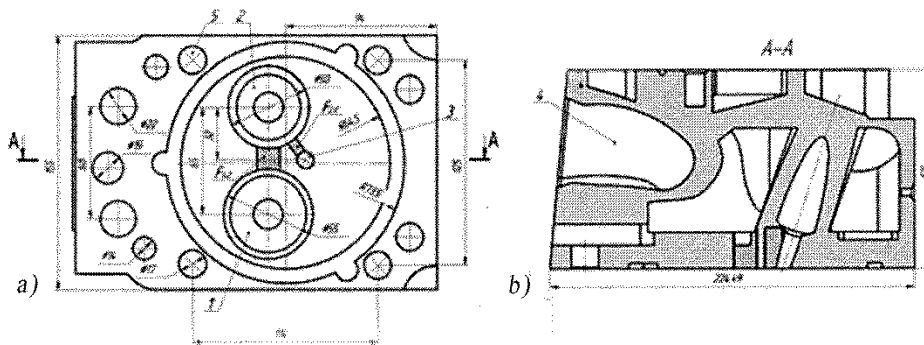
Cylinder Head of diesel 8CHN12/13: a) view from the firing surface of the CH: 1 – inlet valve; 2 – exhaust valve; 3 – hole for installing the nozzle, 4 – inlet channel; 5 – holes for mounting pins CZ; F_{1-2} – inter-valve jumper; F_{2-f} – umper between the exhaust valve and the nozzle cup; b) cross section along the line A-A
